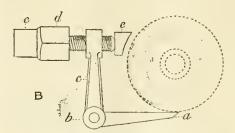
MESSRS, COLDWELL'S FORM OF BOTTOM BLADE ADJUSTMENT OF CUTTERS.
